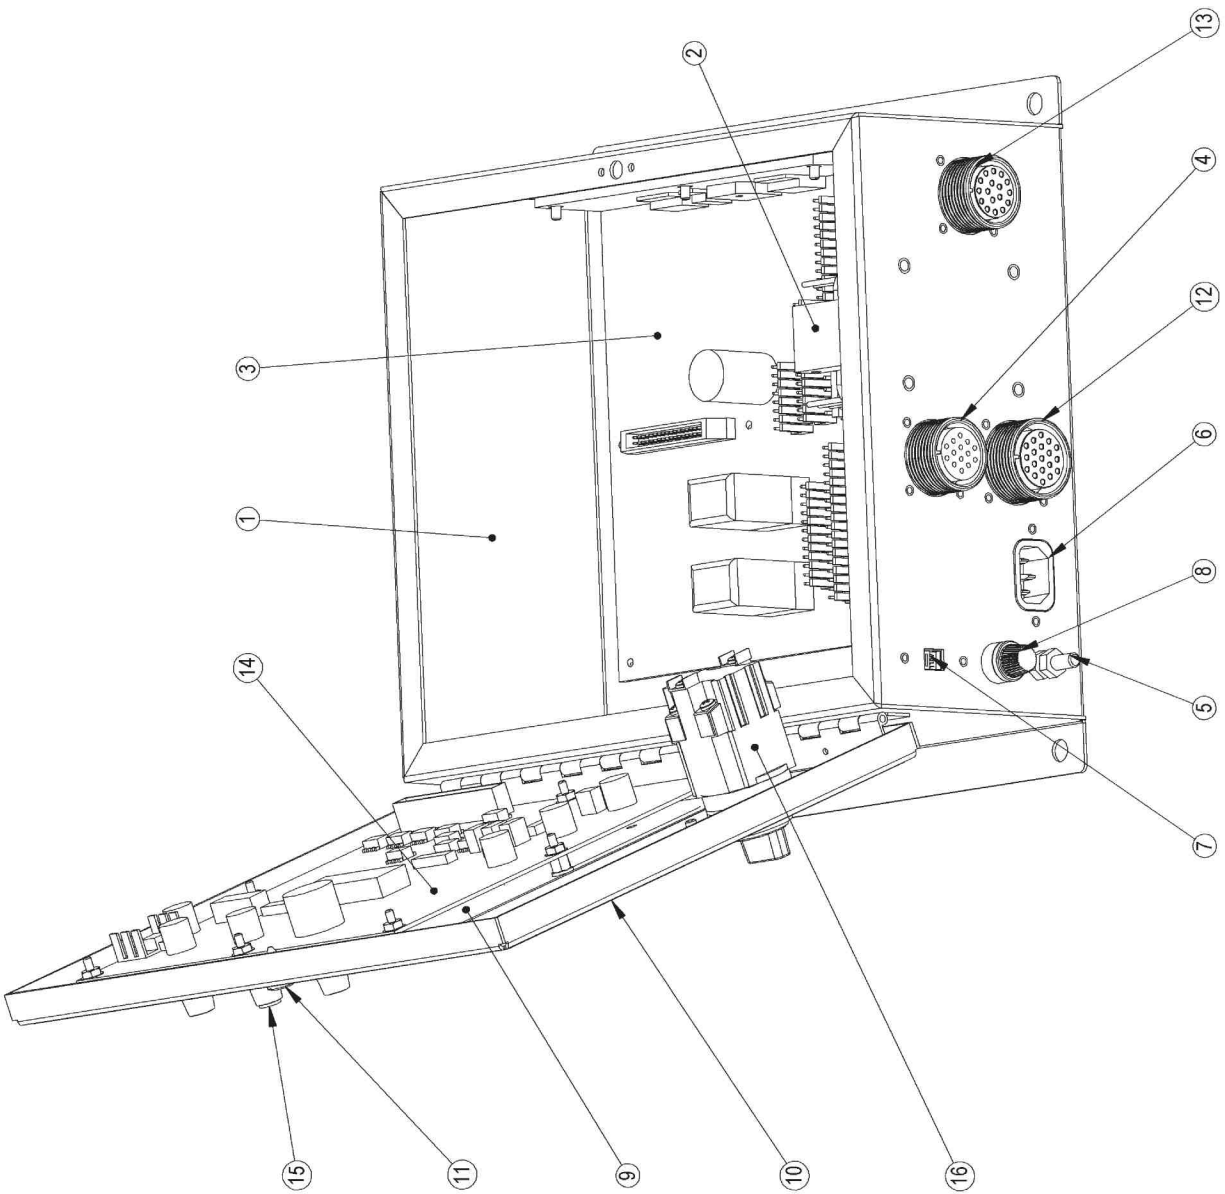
AVC-5 CONTROL EXPLODED VIEW
